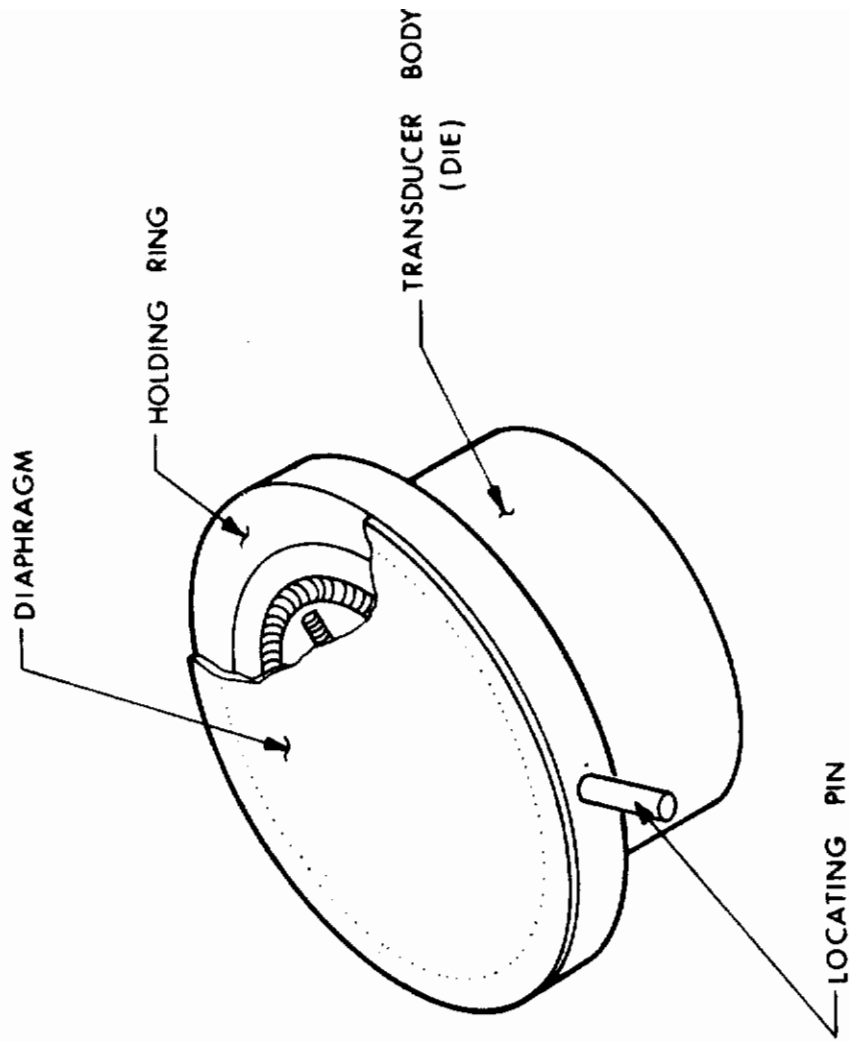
IMPROVED METHOD OF DIAPHRAGM MANUFACTURE
